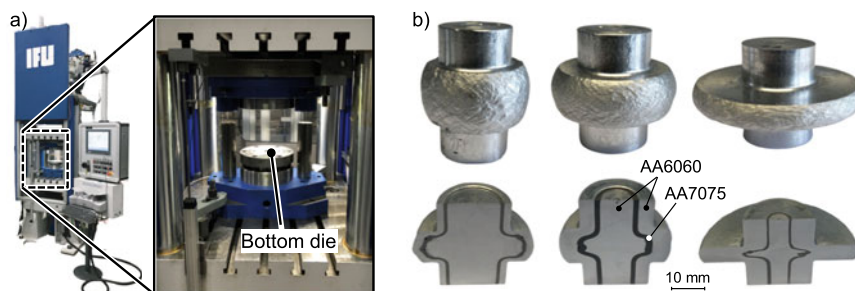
Experimental setup for cold flange upsetting a hydraulic programmable press, b deformed hybrid components before and after cutting and etching
